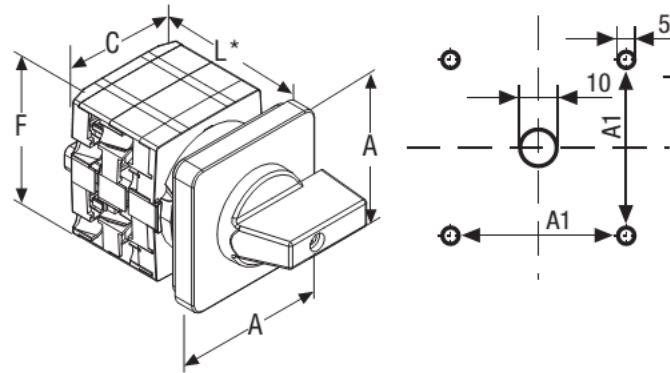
Center mount $\Phi 22.5\text{mm}$ (Single hole)
